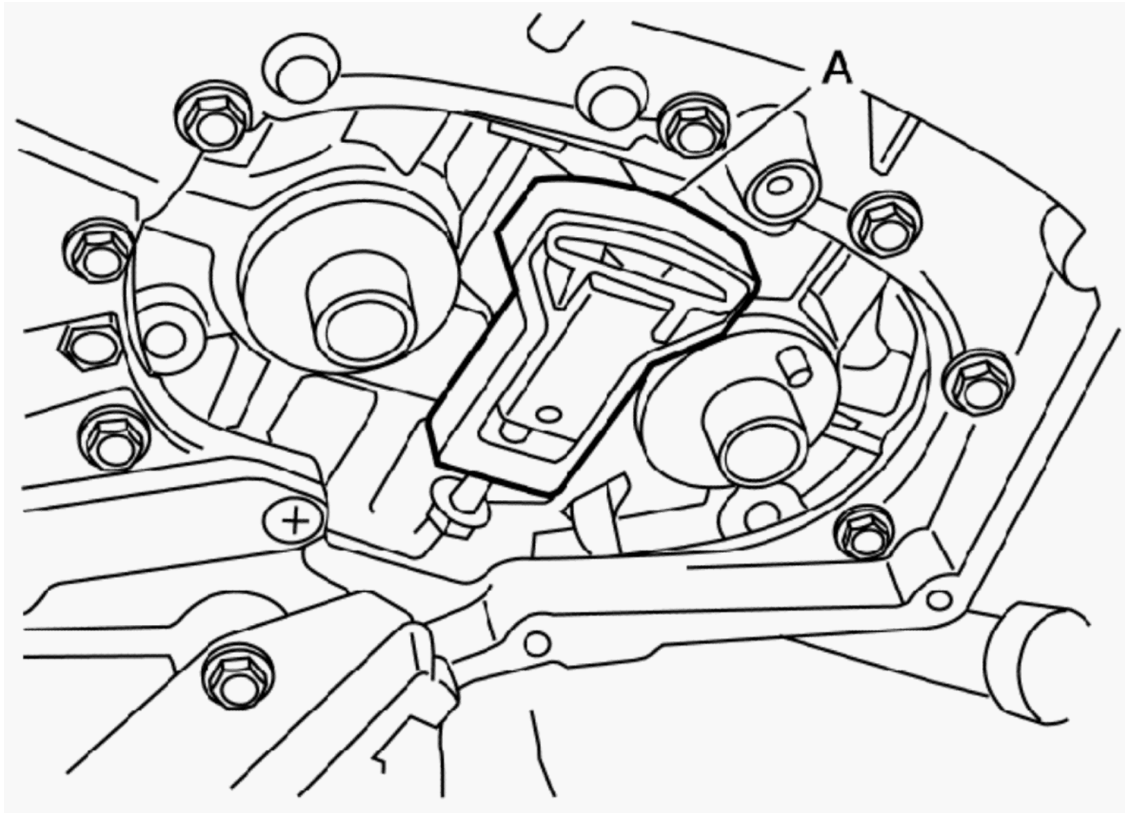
Identifying Secondary Timing Chain Tensioner Shoe Tool (A)
